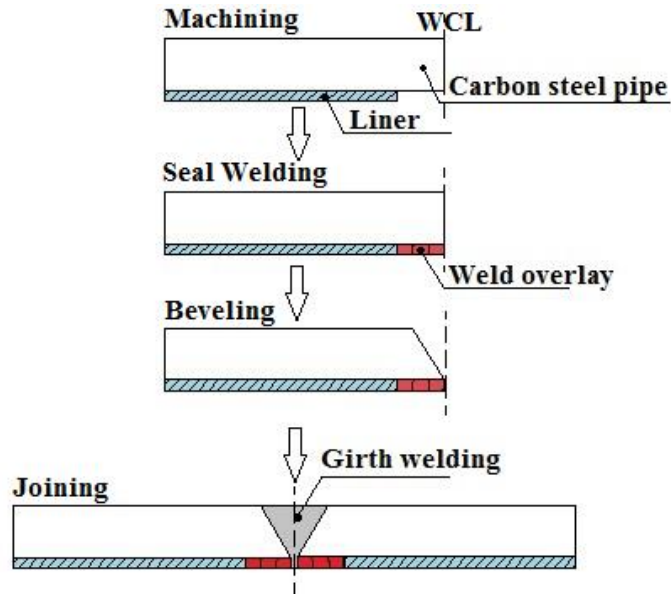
Weld preparation to seal the pipe at ends
